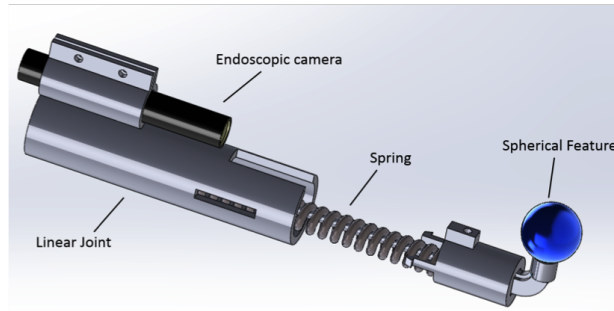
Vision-based Single Axial Force Sensor: CAD drawing showing the spring embedded inside a linear joint.
